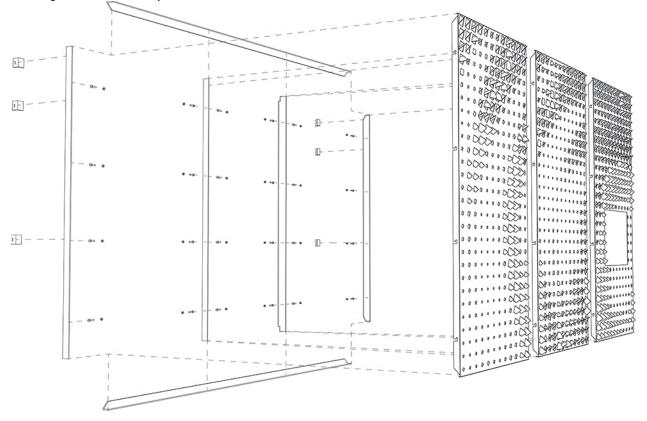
This assembly drawing shows how the steel frame was built with the panel's tabbed detail for installation.
